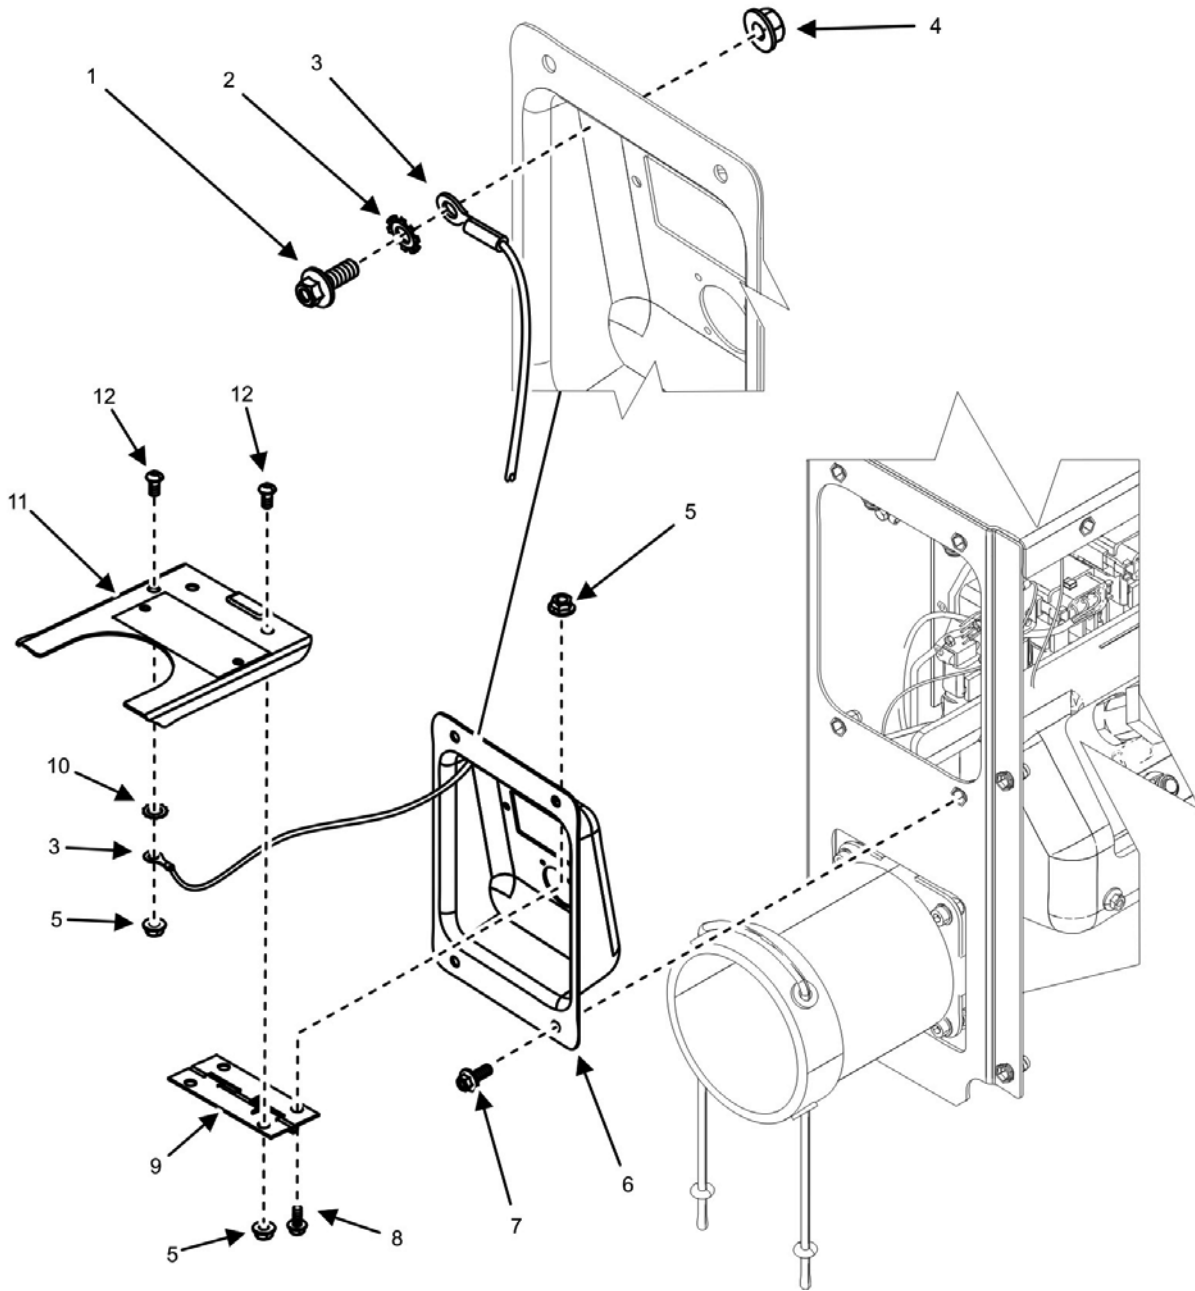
Convenience Receptacle Assembly (Sheet 1 of 7).
